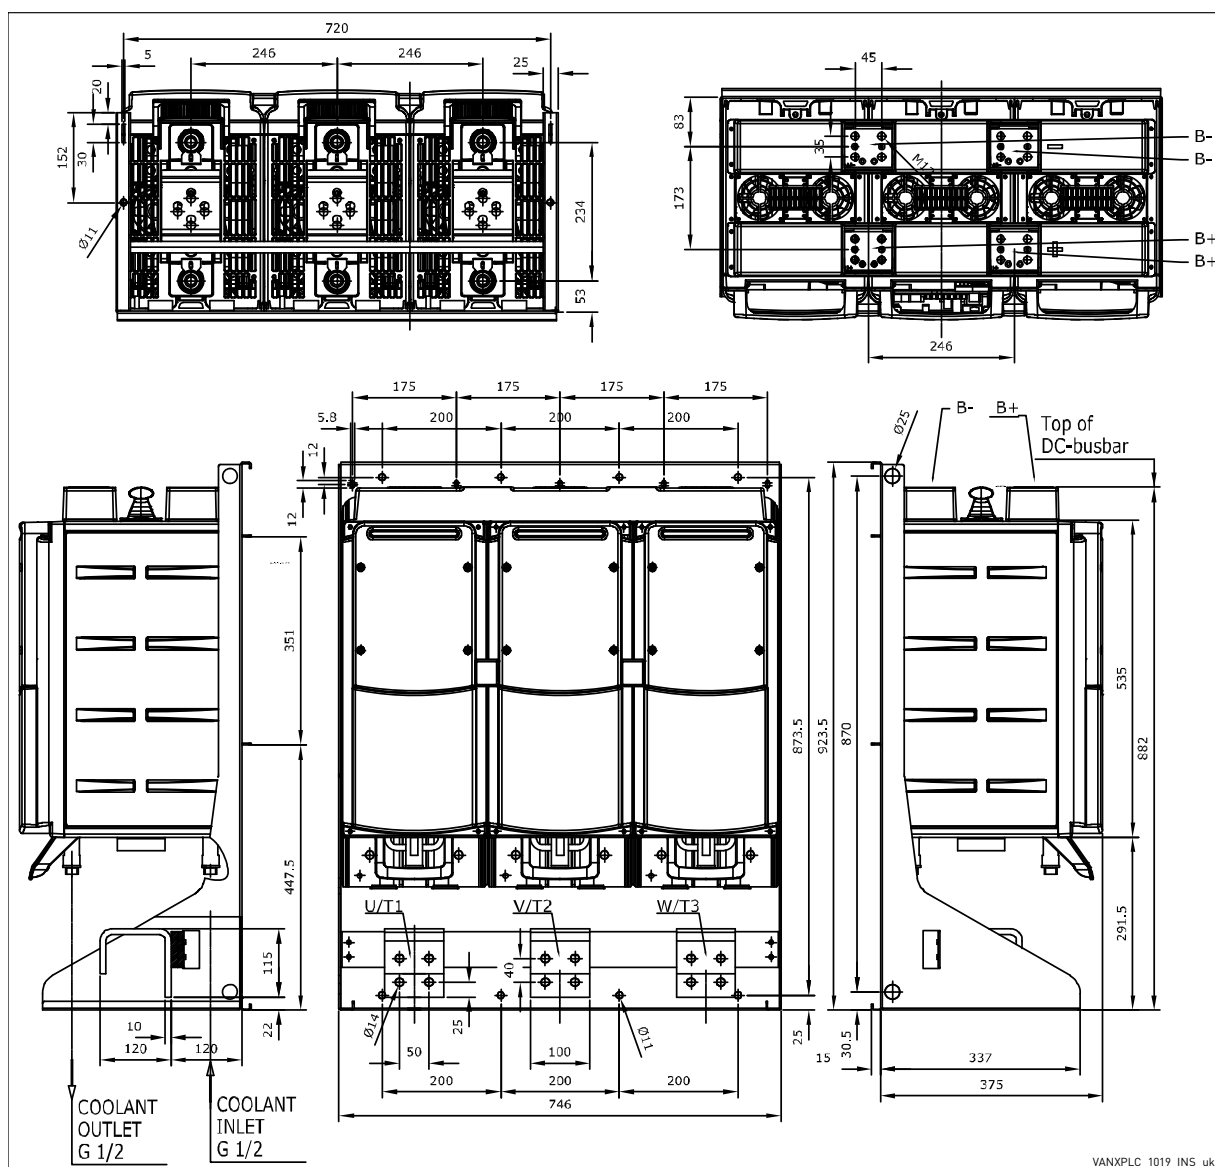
Vacon NX Liquid-Cooled inverter dimensions, CH64, IP00
